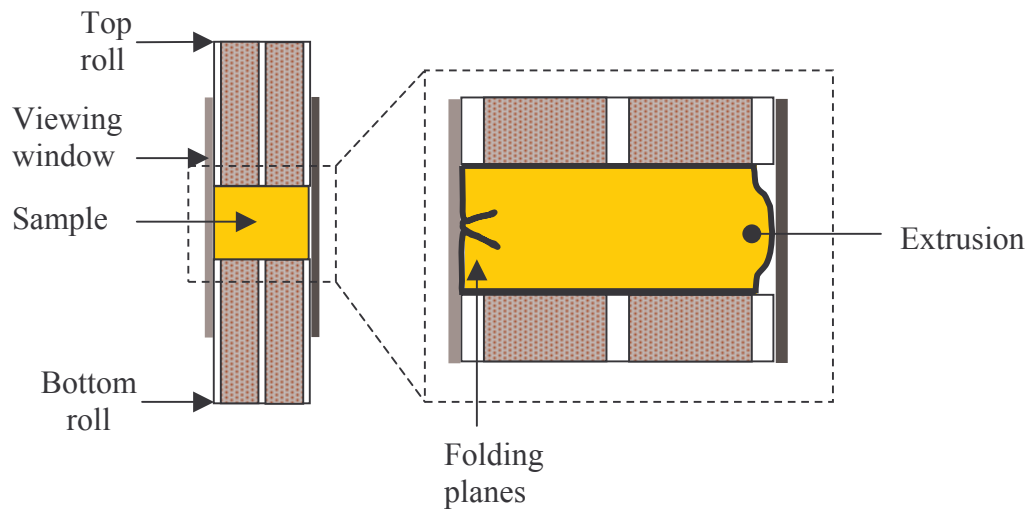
Material folding and extrusion due to reduced blanket width.
